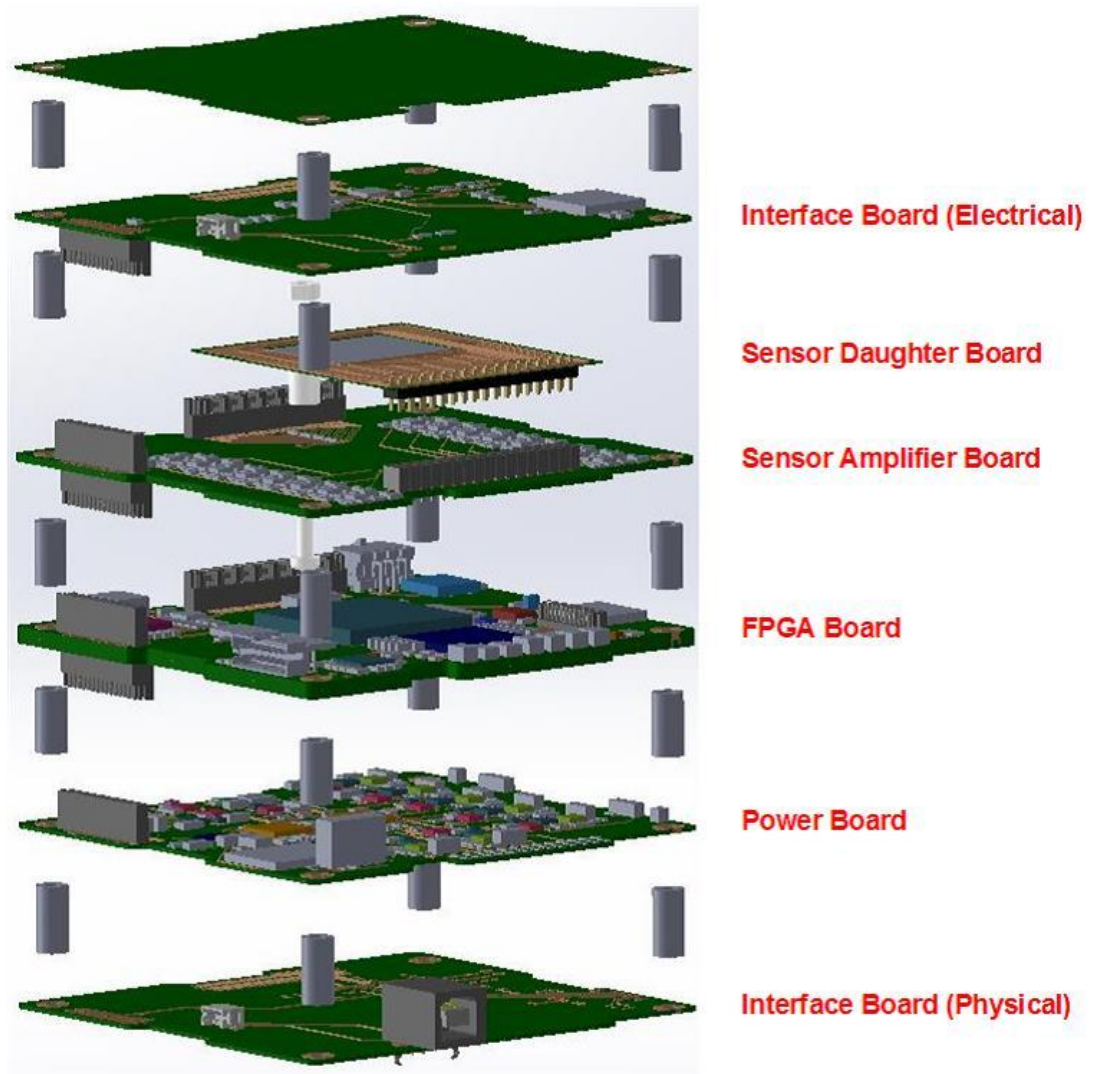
Exploded CAD view of the MSU hardware stack [17].
